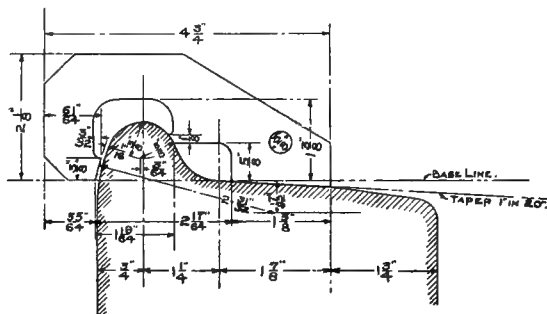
MAXIMUM FLANGE THICKNESS GAGE, FOR ALL WHEELS
